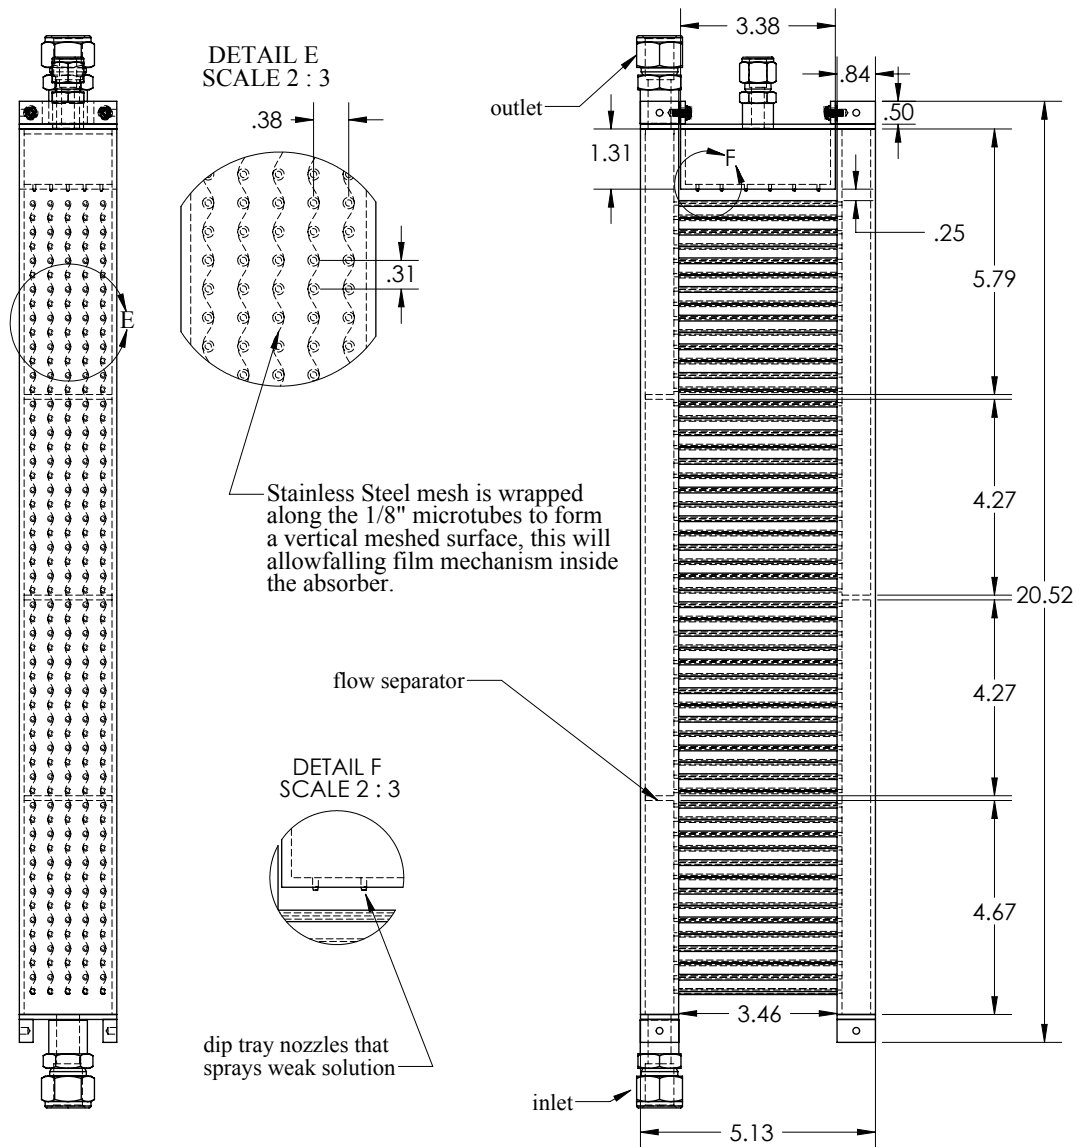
Side and front view of the designed micro channel heat exchanger with the dimensions
